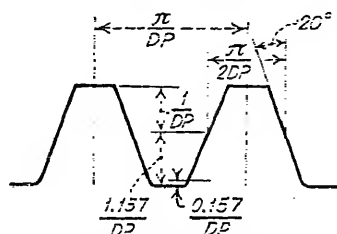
Basic rack of 20-deg. full depth gear-tooth system.
